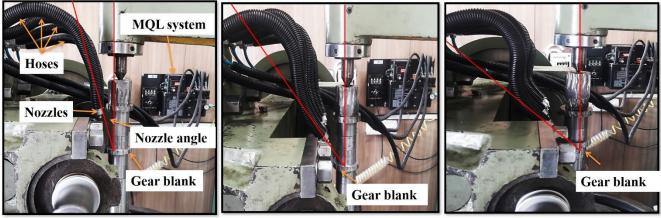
Experimental apparatus developed for MQLAH: (a) gear hobbing machine equipped with the MQL system (b) details of the MQL system MT-MQL V2.2.
